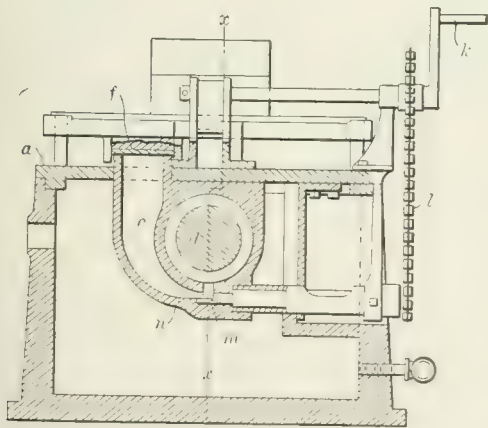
Recent Improvements Made in the Plunger Type of Machine.
